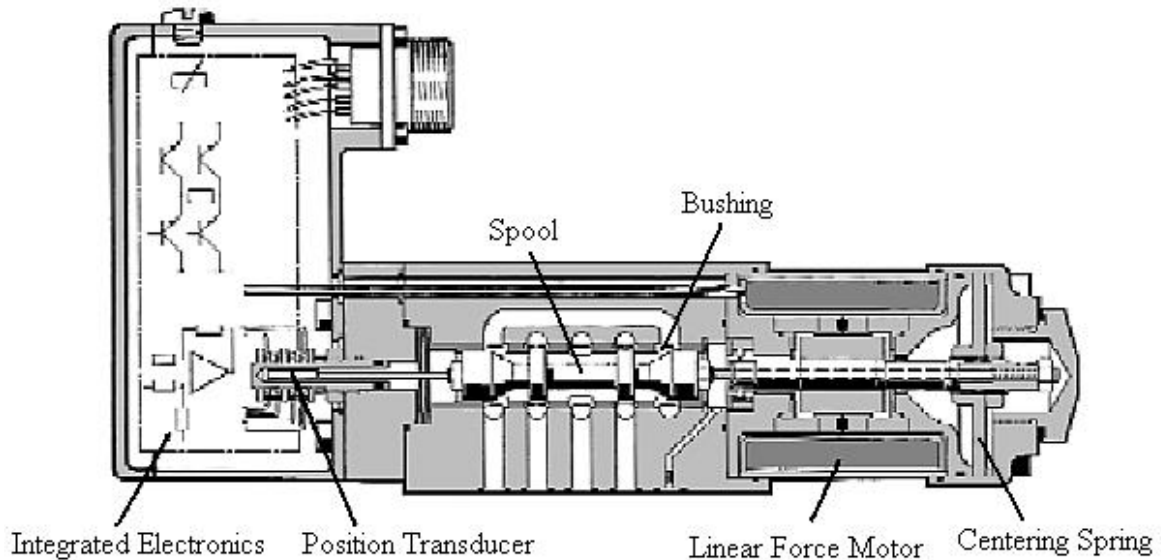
Drawing of a DDV valve manufactured by MOOG Inc [32].
